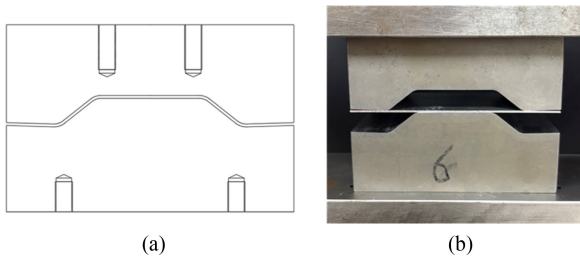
(a) Drawing of the optimized die geometry, (b) Photograph of the fabricated die of the fabricated die
